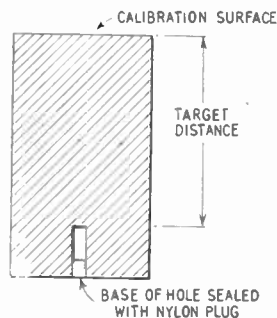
Section through ultrasonic test block showing flat bottomed drilled hole.
